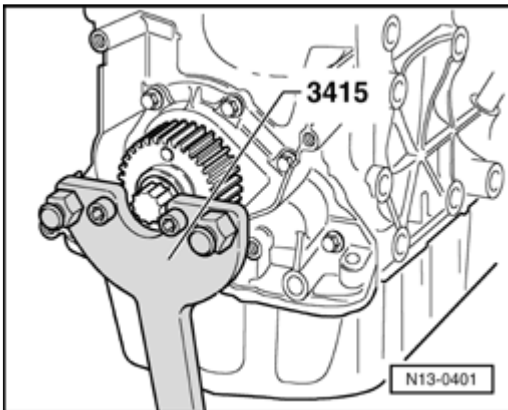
Counter-Holding Crankshaft Toothed Belt Sprocket With 3415
